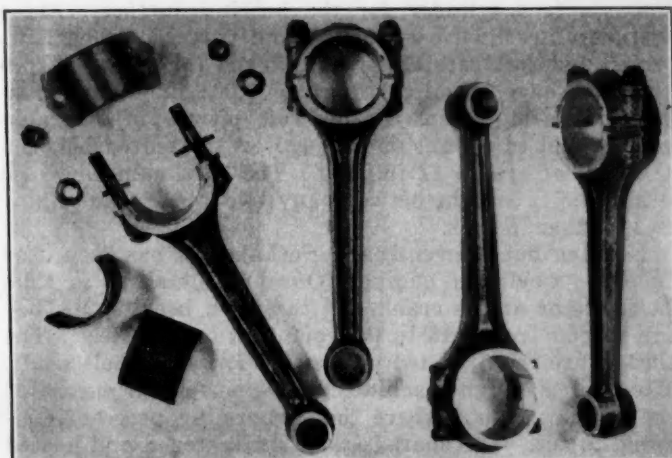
VIEW SHOWING THE PARTS ENTERING INTO THE FORGED DURALUMIN CONNECTING-ROD AND THE ROD COMPLETELY ASSEMBLED
